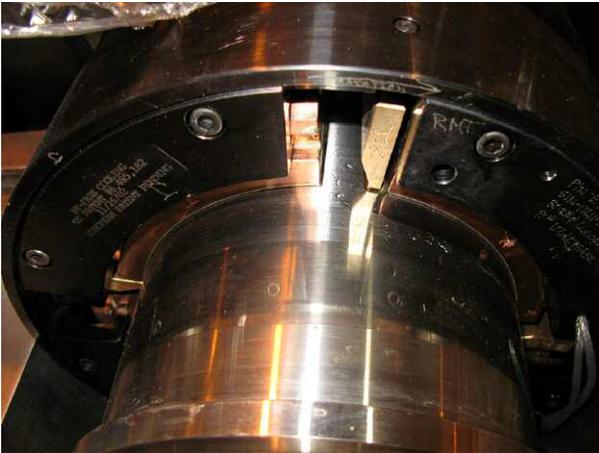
Tilting Pad Journal Pinion Bearing—Evacuated Housing Design.
